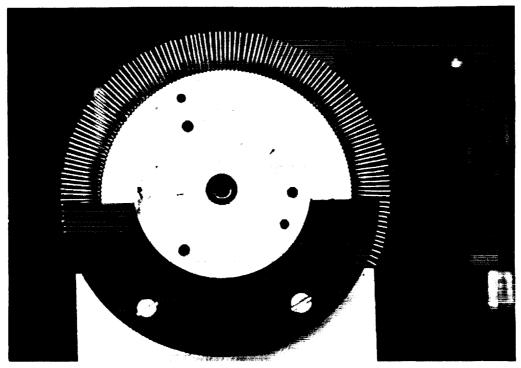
End View of Copper Tubes Nestled in Ball Milled Slots in End of Mandrel.
